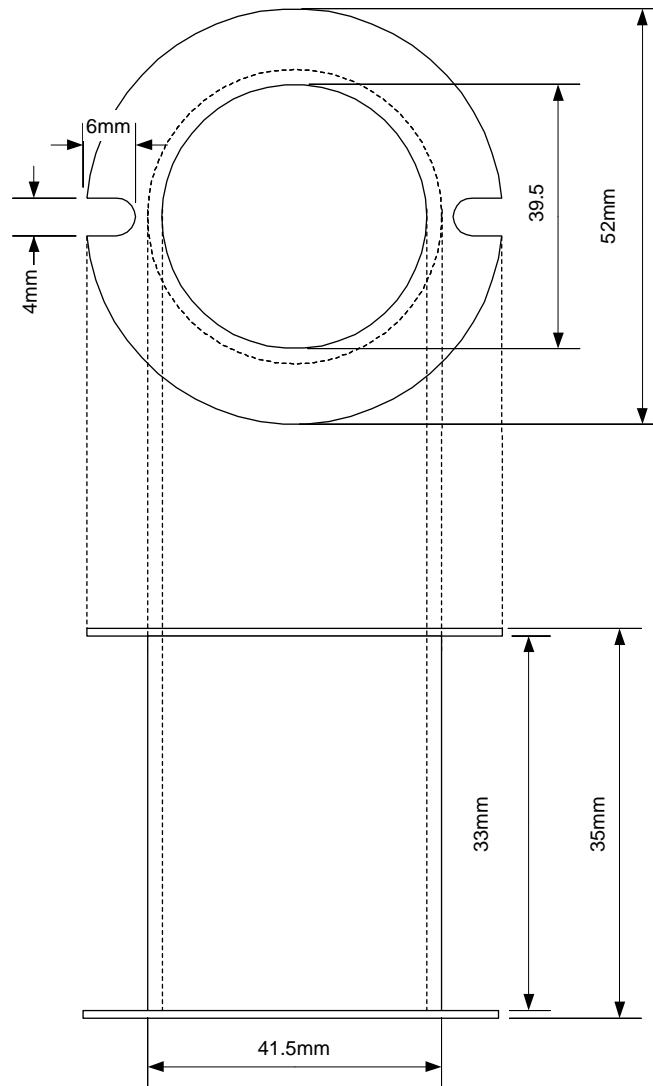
The mechanical layout of the custom made outer coil former used for the primary winding of the coaxial windings arrangement.
